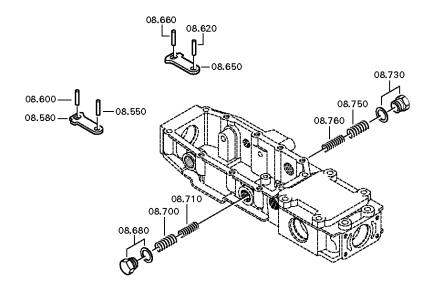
GEAR SHIFT HOUSING
